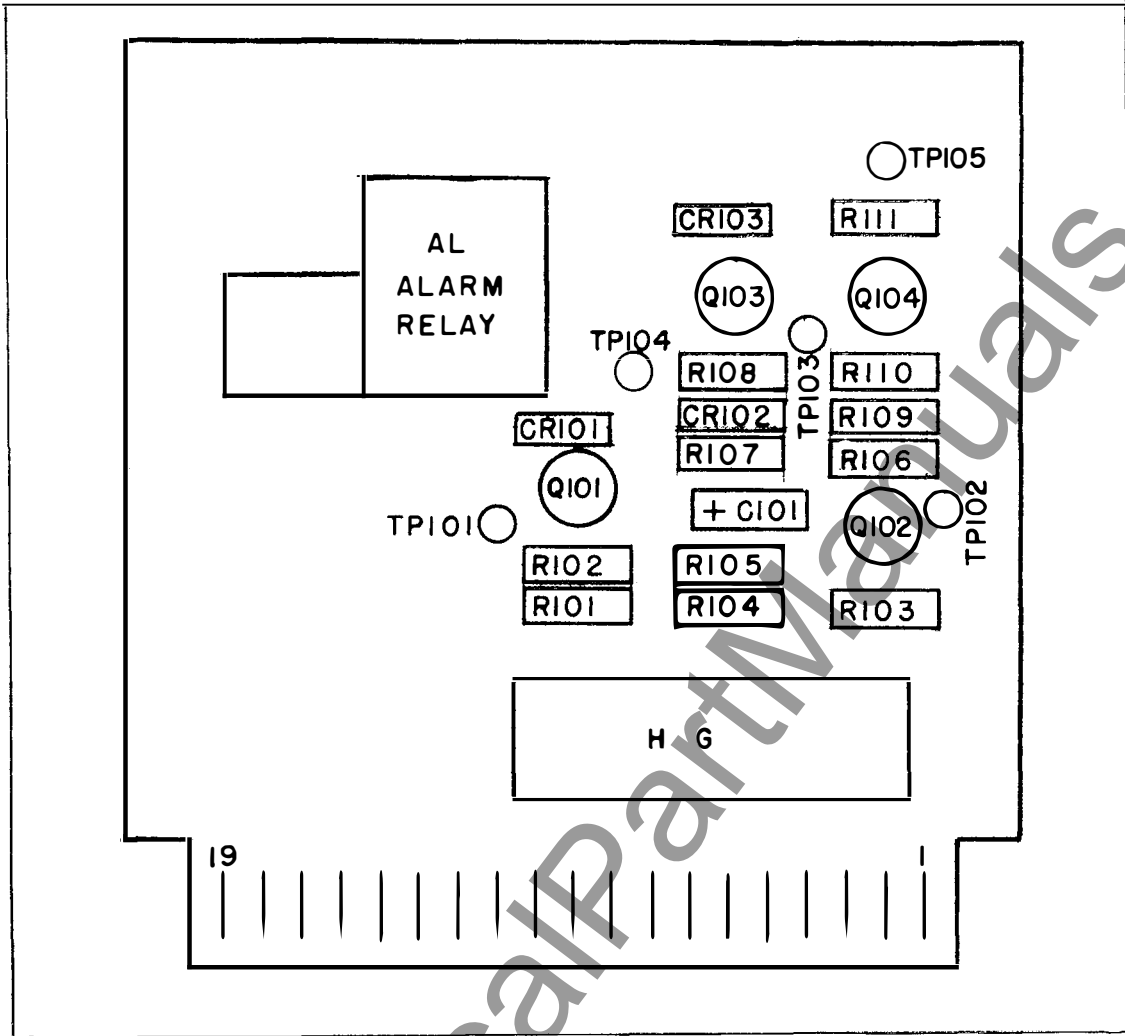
Component Locations on the Relay Output Printed Circuit Board.
